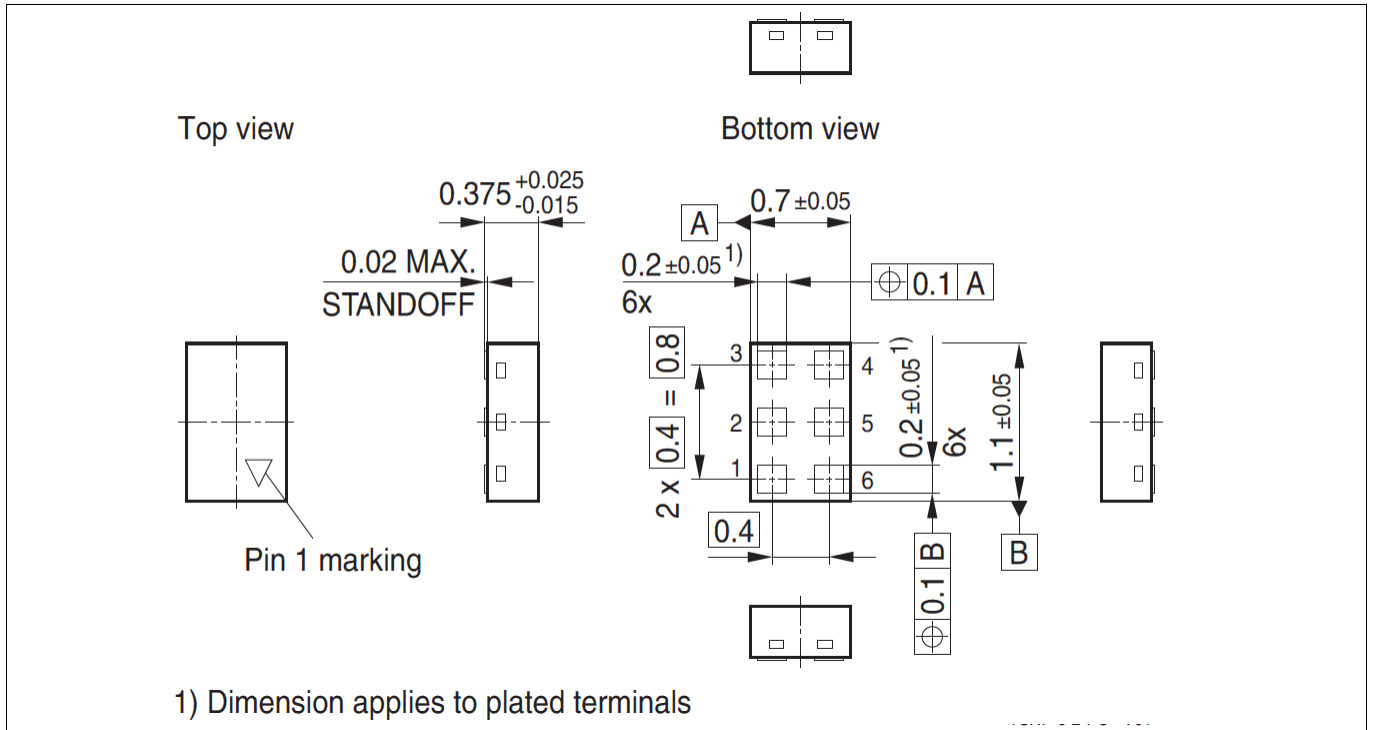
TSNP-6-2 Package Outline (top, side and bottom views)
